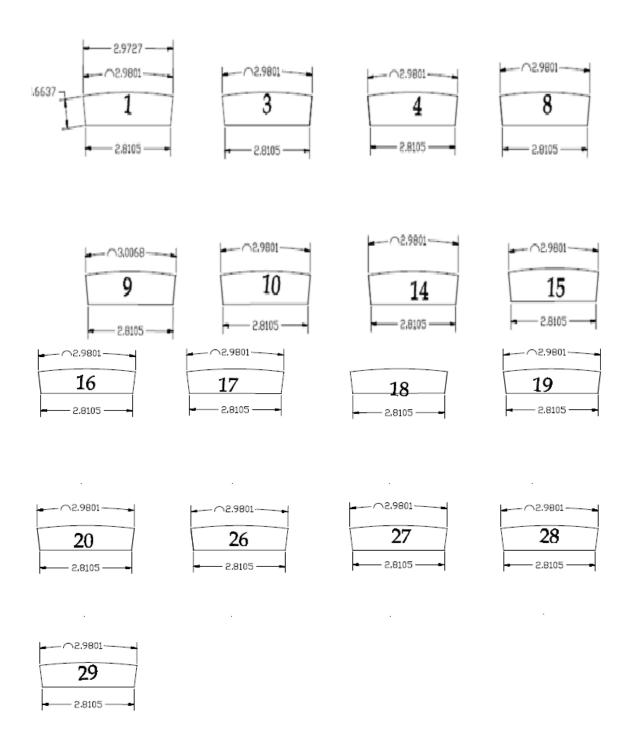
The Dimensions of the pieces of the annular ring (17 pieces with the largest area).
